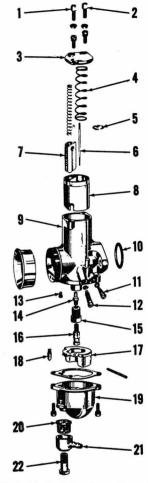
Exploded view of carburetor typical of original equipment on all models.
